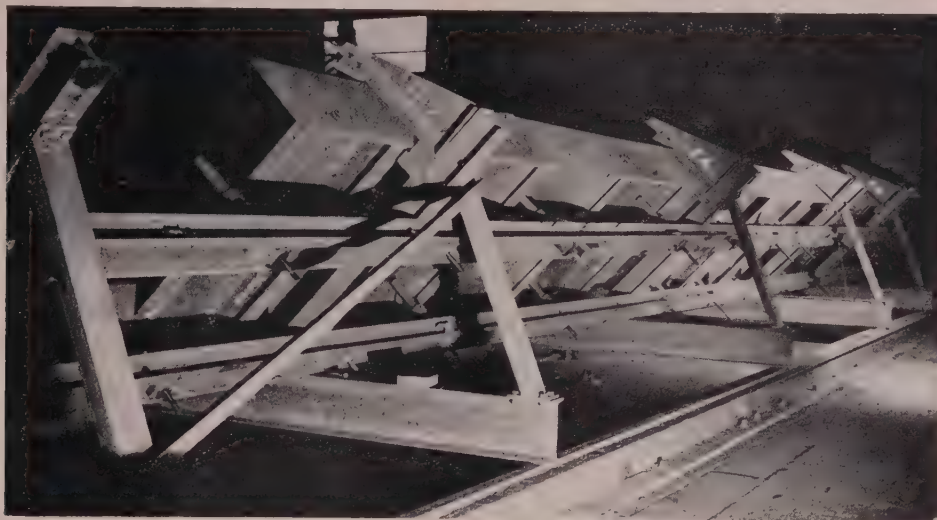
Twickenham Fly-over. Girder assembly jig
